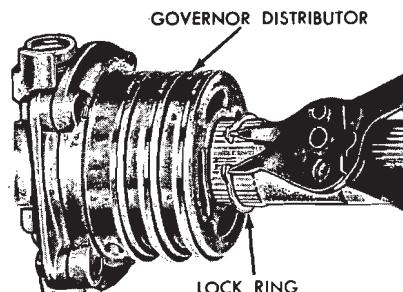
Removing or Installing Governor Distributor Snap Ring—C4 Automatic
